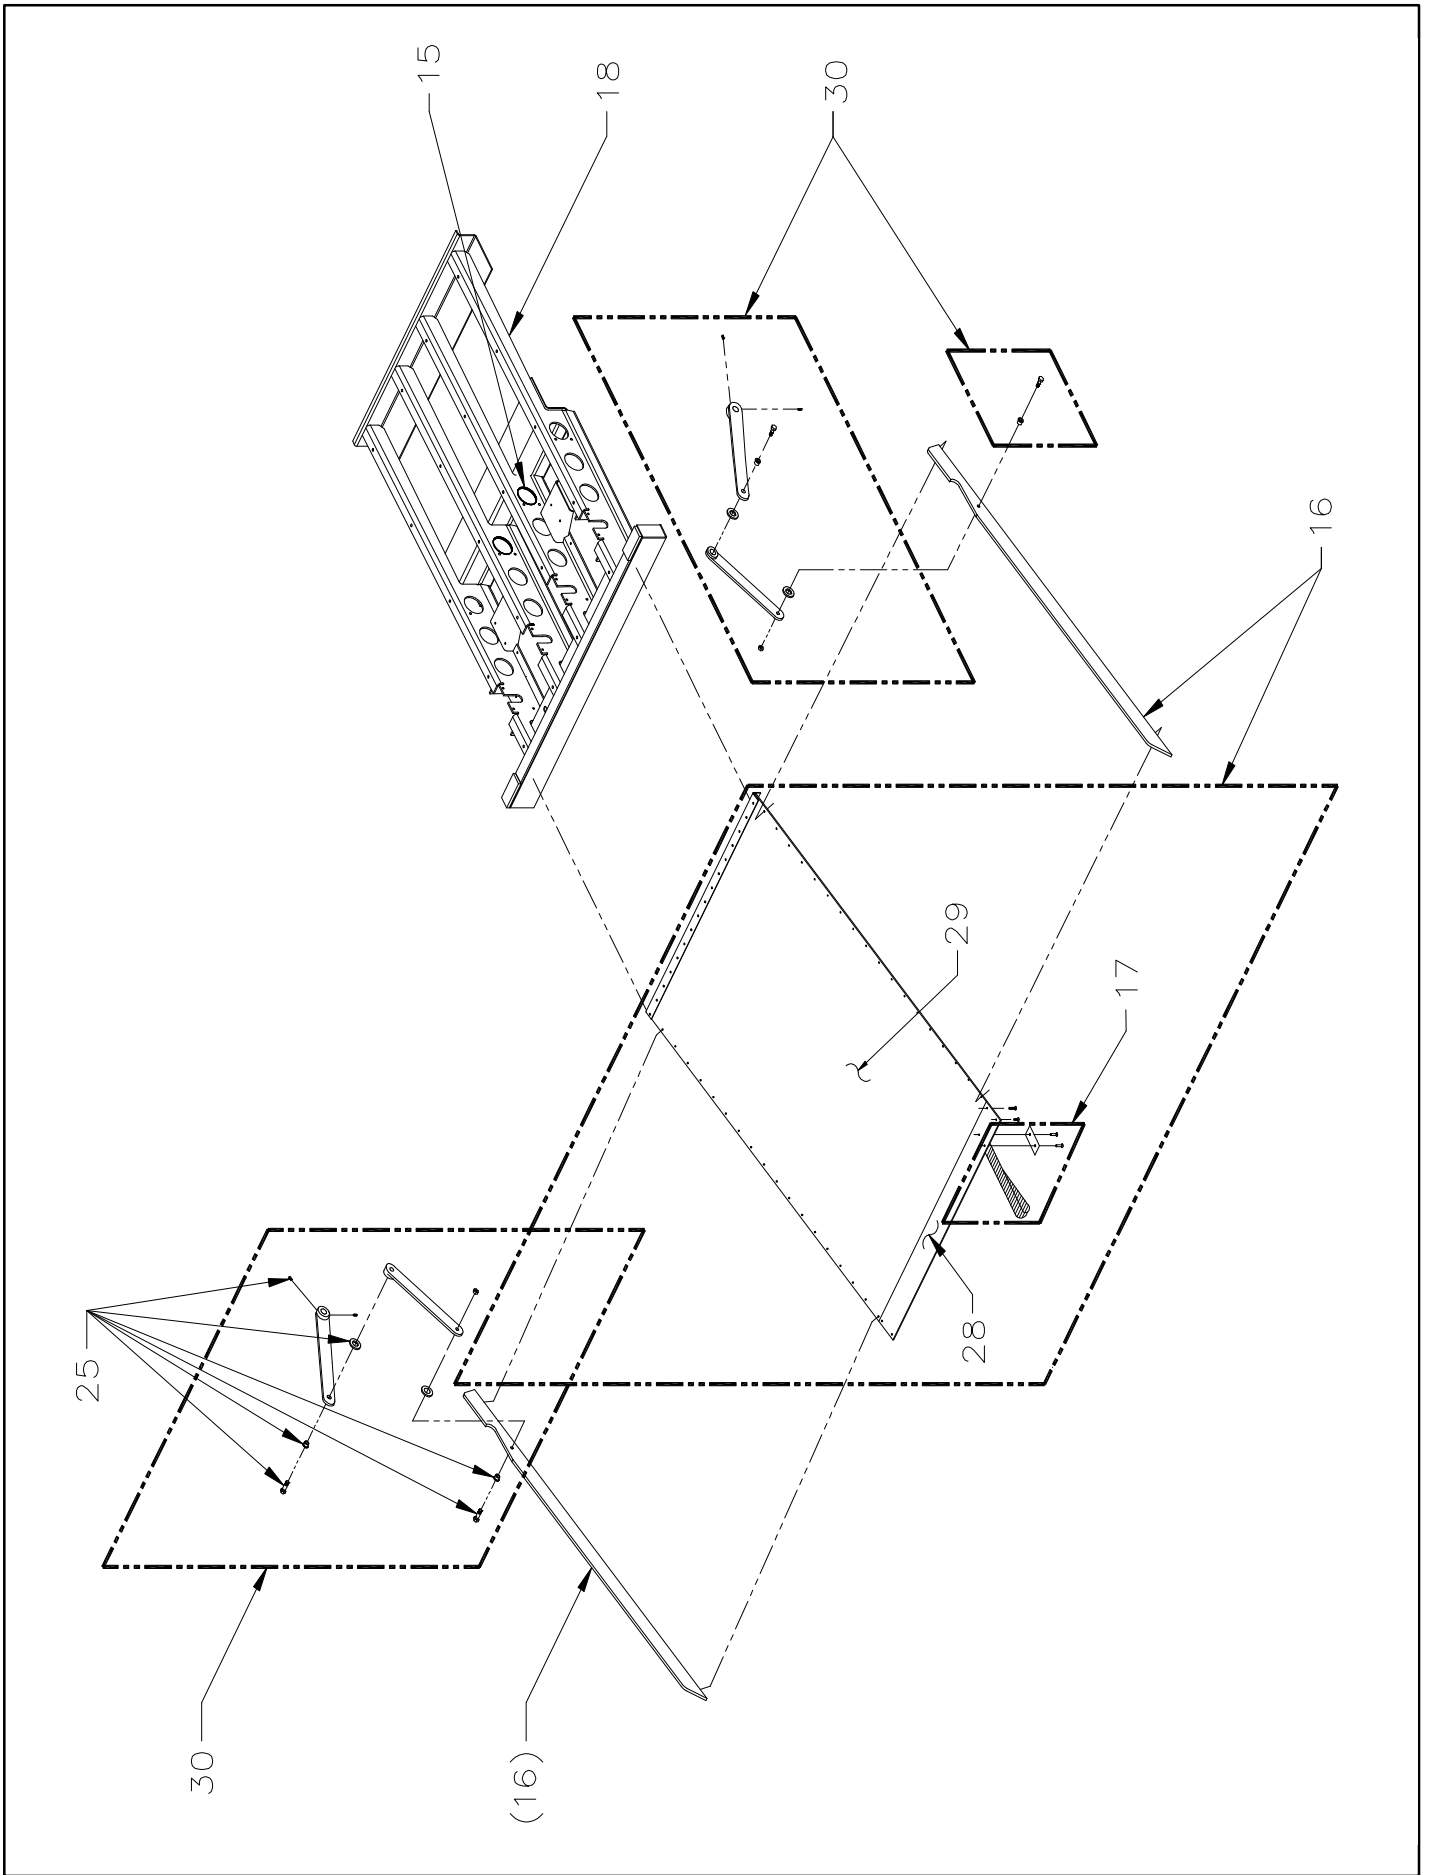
B: RAMP AND SUPPORT ASSEMBLY
